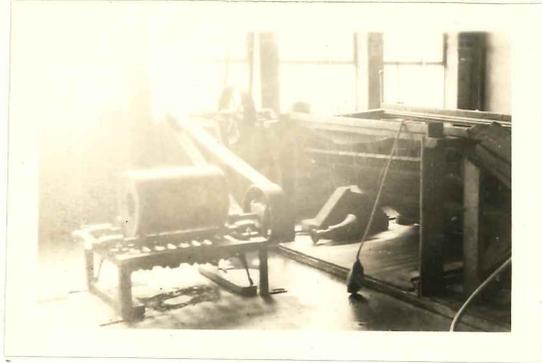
PHOTOGRAPH OF MACHINE FOR MIXING BINDER WITH COAL.
